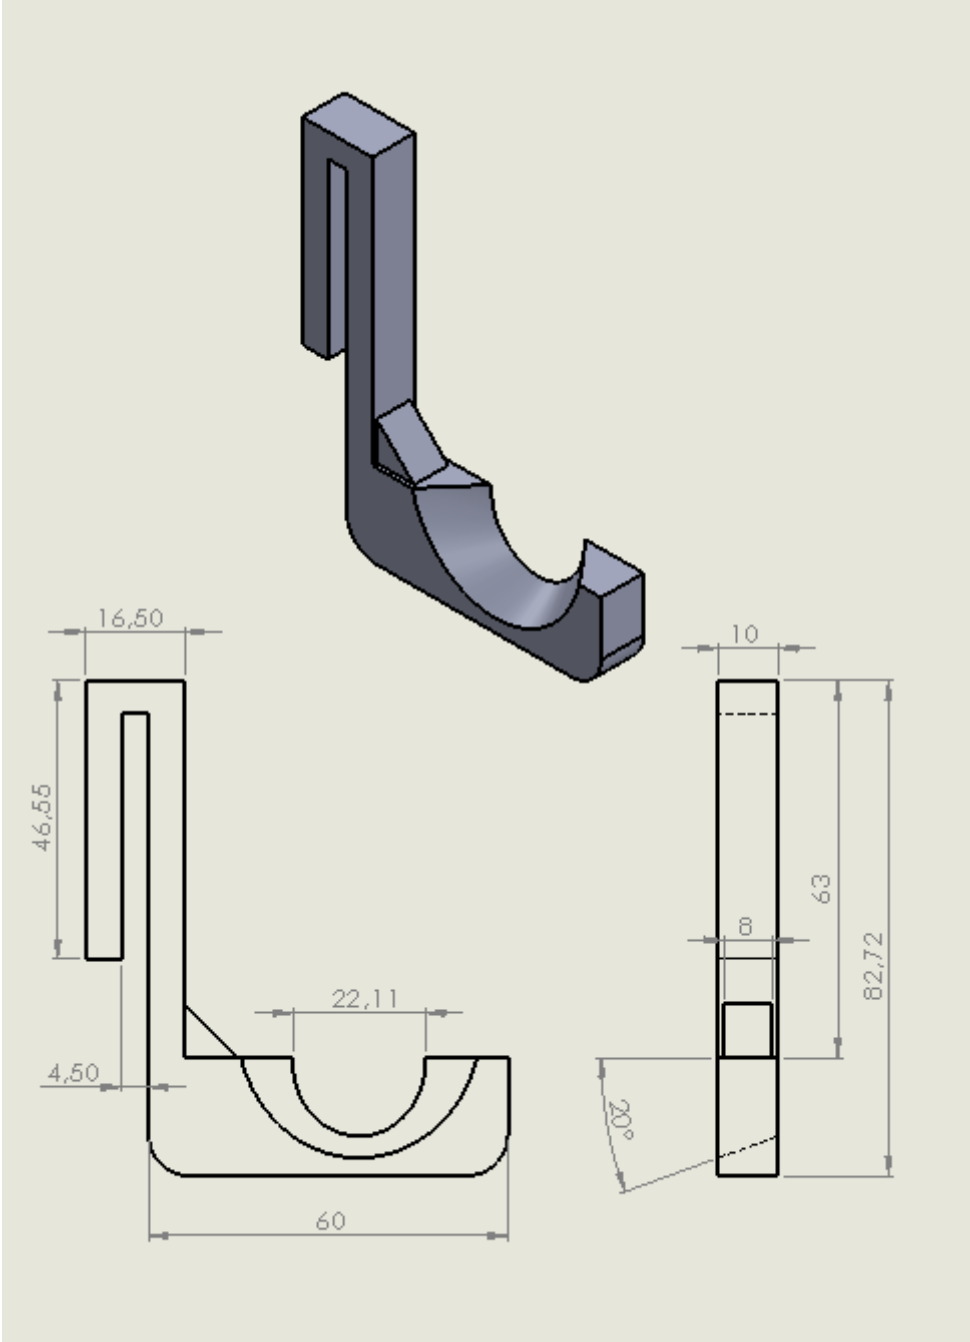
Drawing of the "Buffer glass fixture 1" with dimensions.
